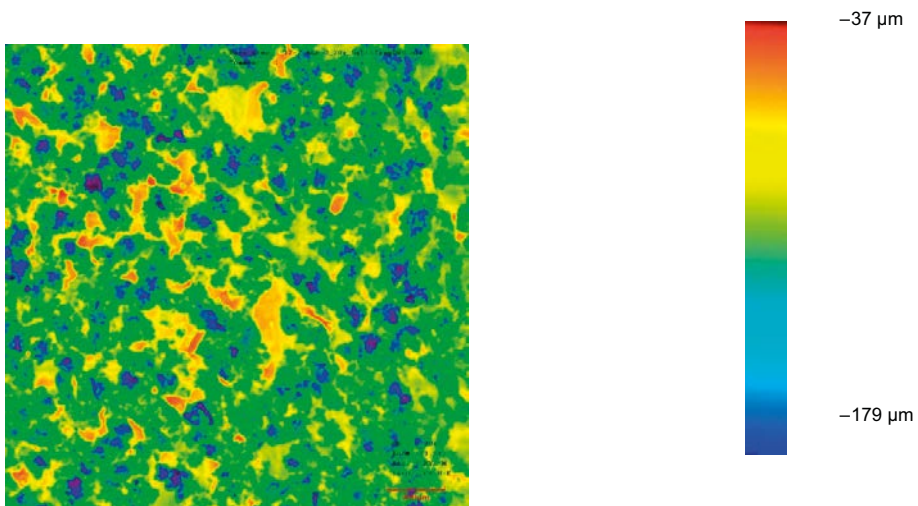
Weld (retreating) on copper material 112/2. The imaged size is 2.6×2.6 mm.
